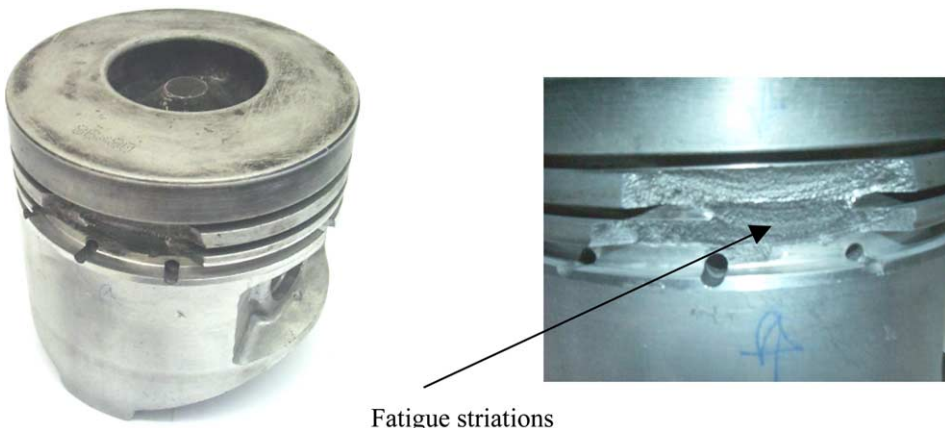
Engine piston with damaged grooves: (a) piston; (b) detail of damaged grooves.
